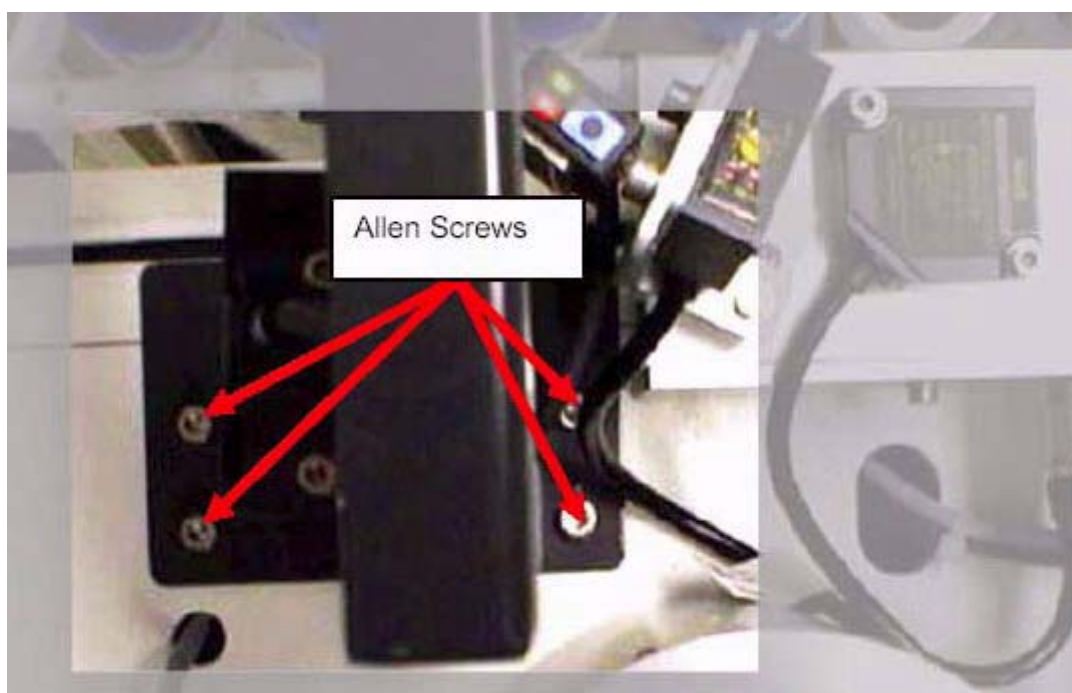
Placing the Barcode Reader Unit on the Cabinet
